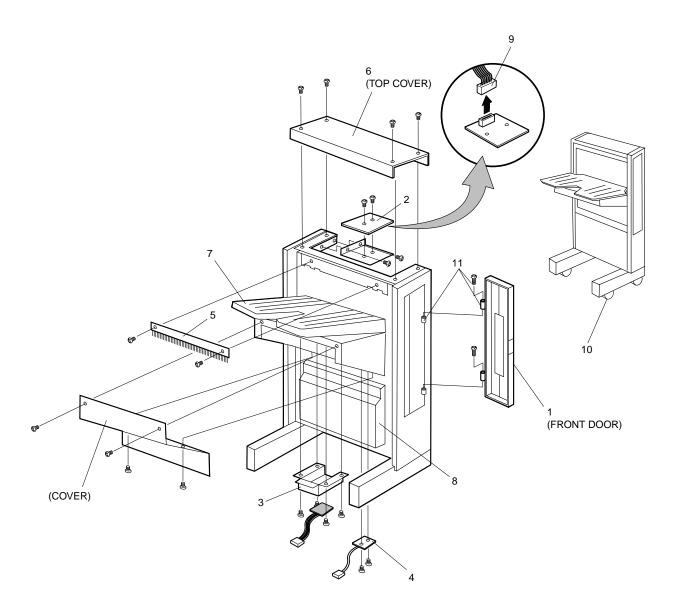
LCOS Stacker Frame Assembly Parts Locational Diagram
